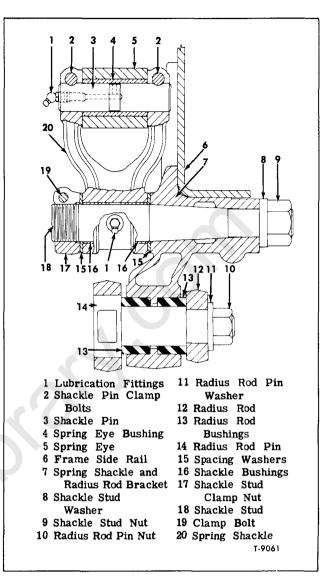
Rear Spring Front Shackle and Radius Rod Installation
